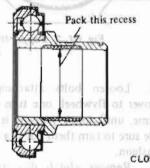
Lubricating Recess of Bearing Sleeve
